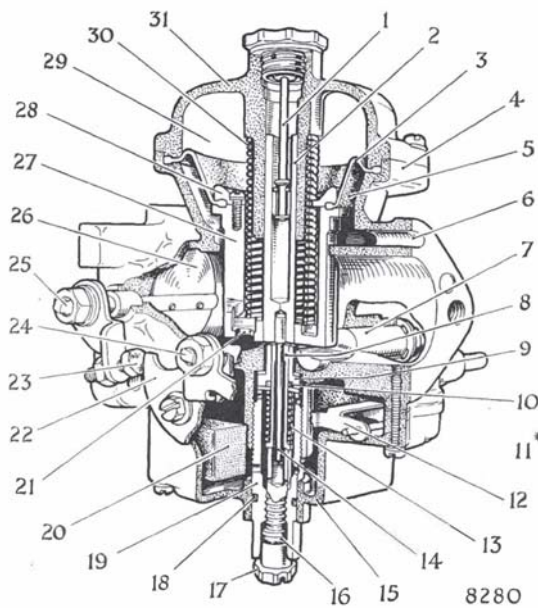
Stromberg 150 CD carburettor — part sectional view
